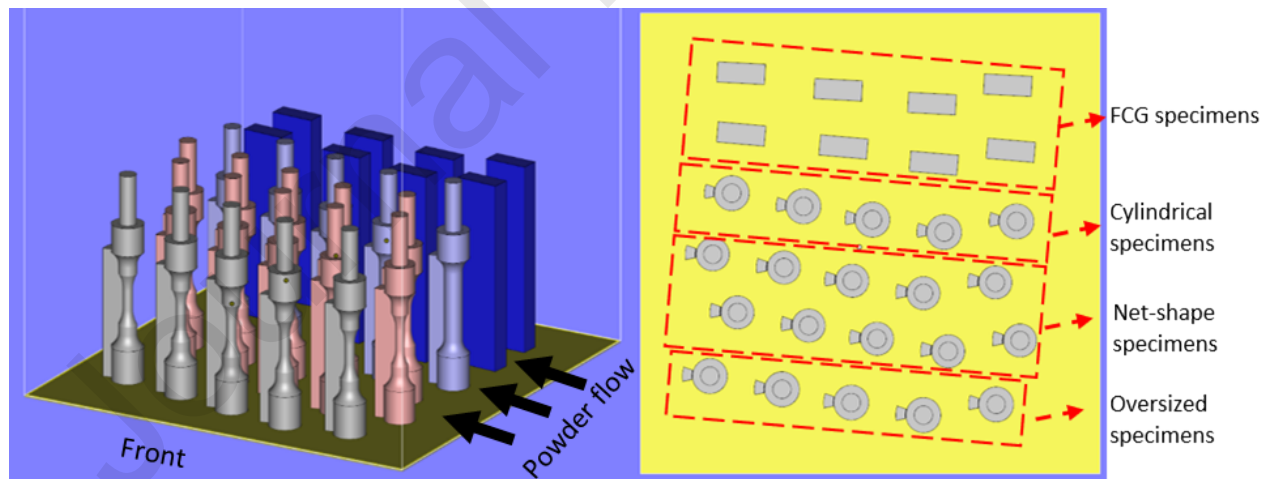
LB-PBF build layout, showing net-shape (NS), oversize, and cylindrical specimens for fatigue testing as well as parallelepiped specimens for FCG testing.
